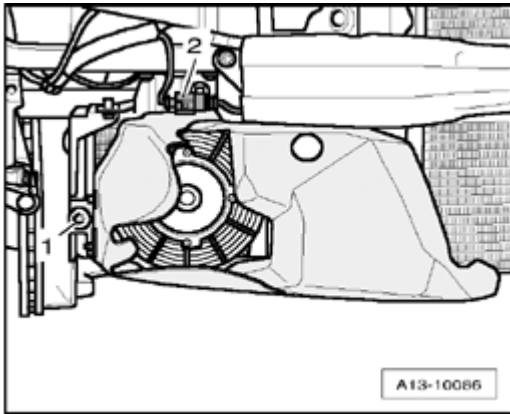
Auxiliary Cooler Air Duct Bolt & Electrical Connector
